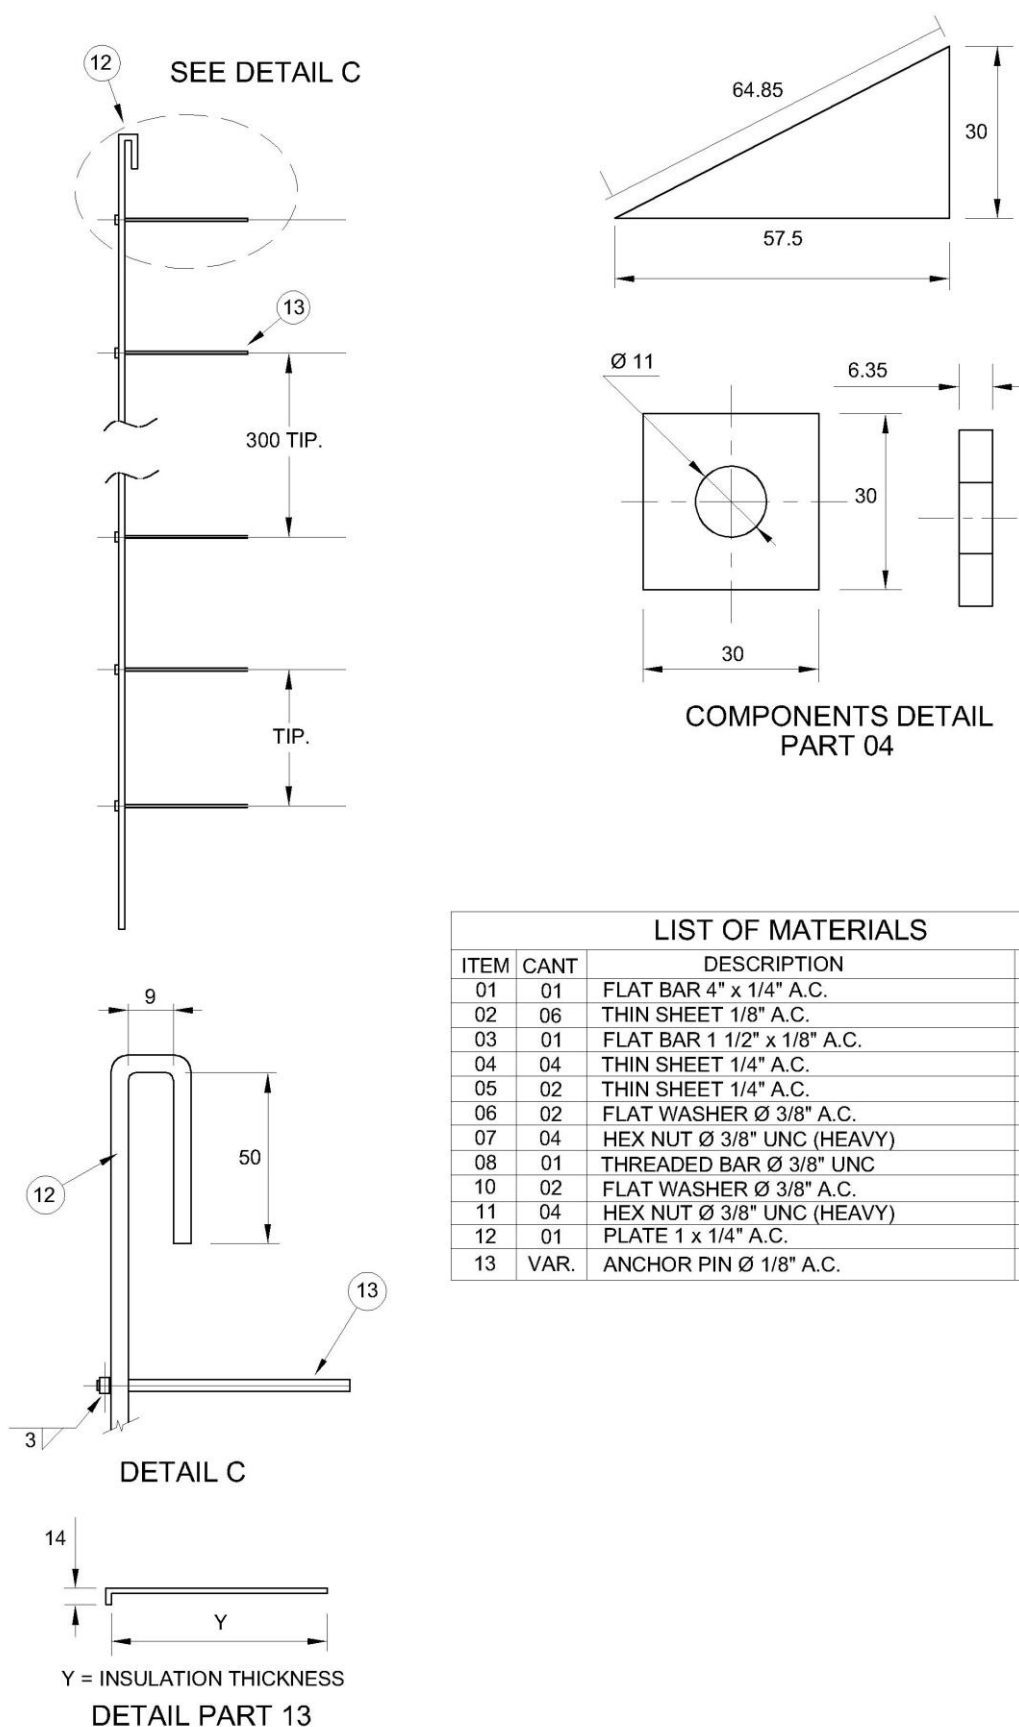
Detail of Floating Anchorage System for Flexible Insulation
